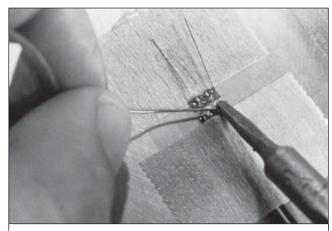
Leadwire end taped to surface in preparation for soldering.
